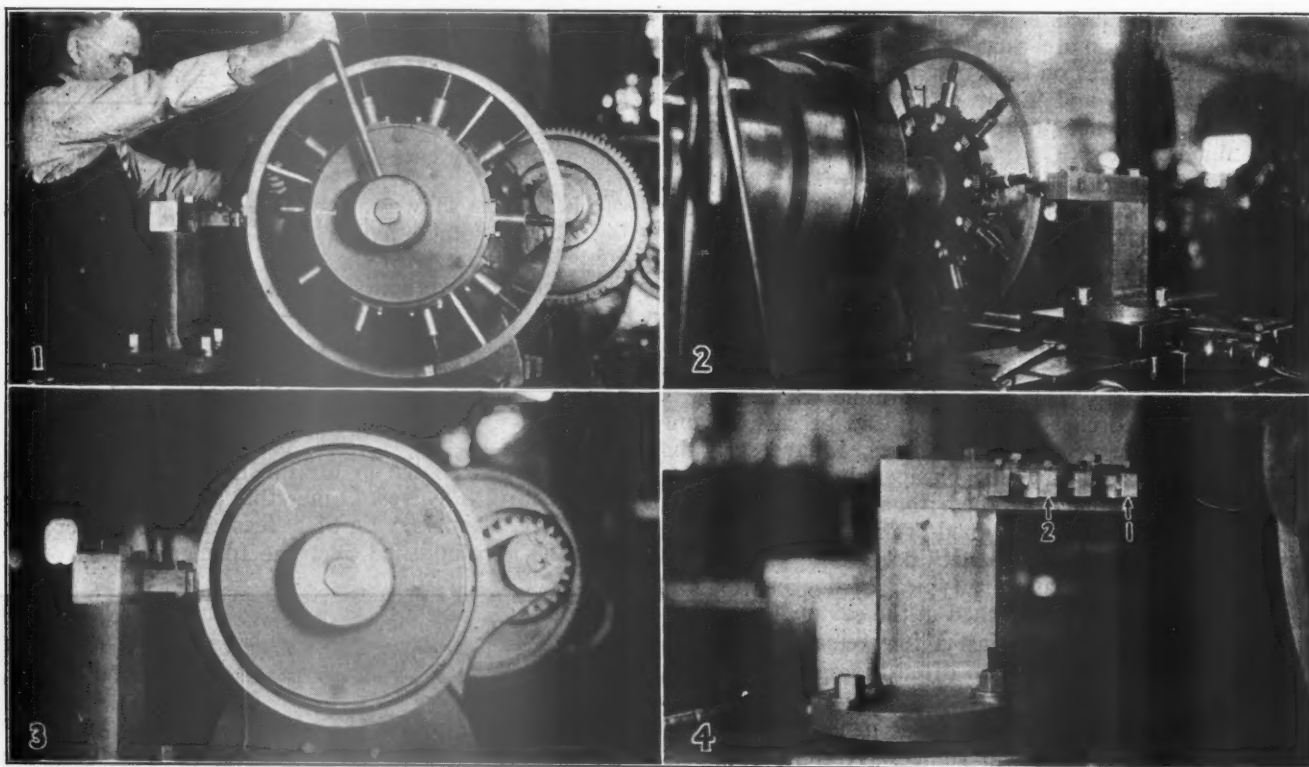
The chuck with the gage rods and the screw sleeves in use; Fig. 2—A rear view showing the small gears which are operated by the master gear; Fig. 3—An 18-in. packing ring ready for turning; Fig. 4—The tool holder
